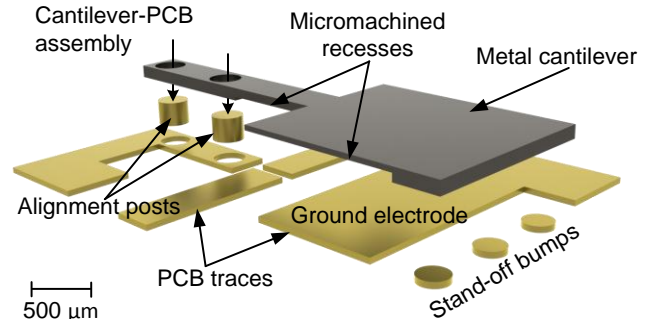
Exploded view of structure showing cantilever relay. Recesses are machined (2  $\mu$ m across contact, 8  $\mu$ m across electrodes) for DC-contact switching. Gold posts align and hold the cantilever over gold-coated copper traces on the PCB.
